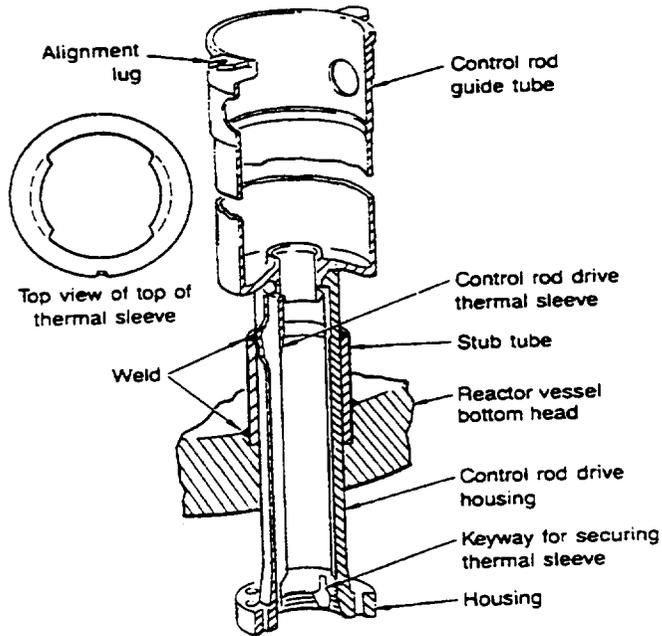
Typical control rod drive housing, stub tube, and guide tube arrangement.
